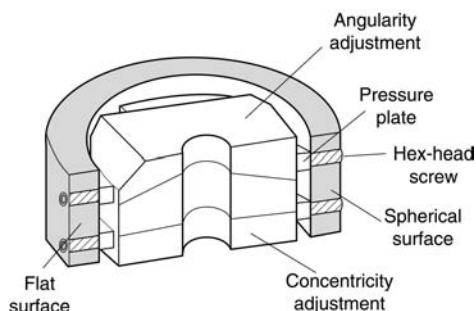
Alignment fixture for minimizing bending strains in axial fatigue testing
